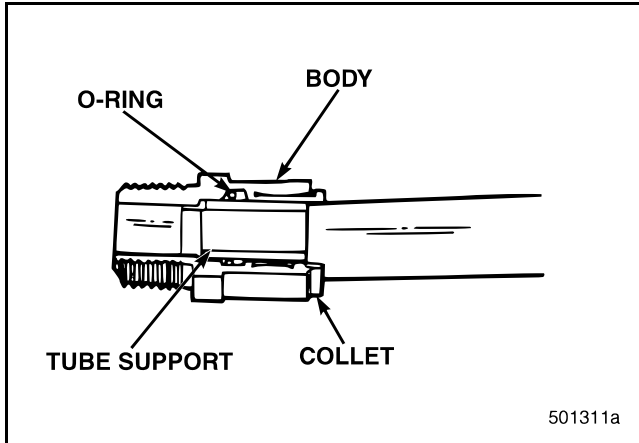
Push-to-Connect Fitting Cross-Sectional View
